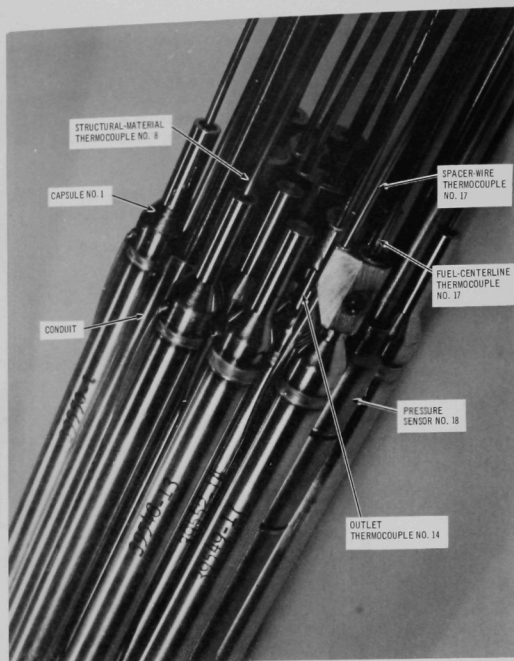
View of Upper End of Capsules of Subassembly XX01 during Final Assembling. ANL Neg. No. 113-2510A.
